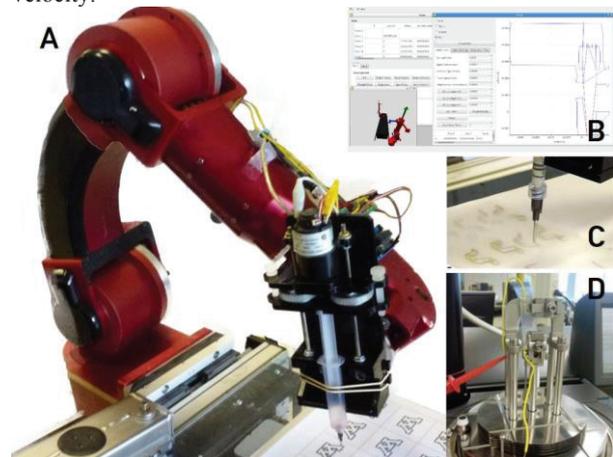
(A) Custom syringe extruder head mounted on 6-axis robot arm, CORVUS (Medical Robotics & Devices Lab, University of Minnesota). (B) GUI for tool path and extrusion velocity control. (C) Test samples printed with SS-26S on flexible silicone substrate. (D) Material characterization test on a Q800 DMA tester (courtesy 7-Sigma, MN)
